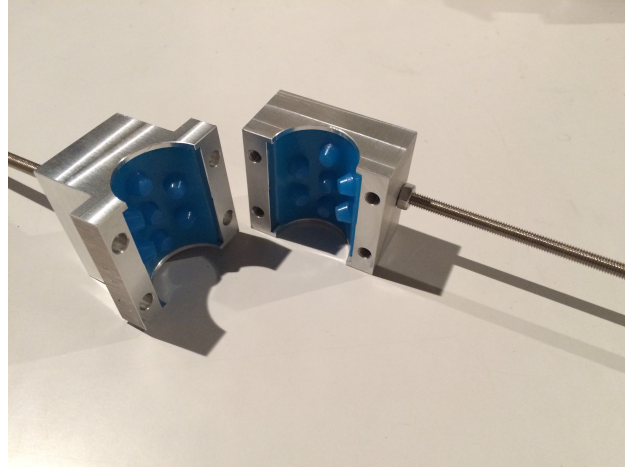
Picture of the manufactured clamp and its damping material inlet. The clamp is manufactured from aluminum, which can be parted, and has a small guidance for an easy change and positioning of the damping material inlets. The material is a silicon gel damper, which damps frequencies  $\geq 30$  Hz sufficiently and has its own resonance frequency in the region from 15 to 22 Hz.
